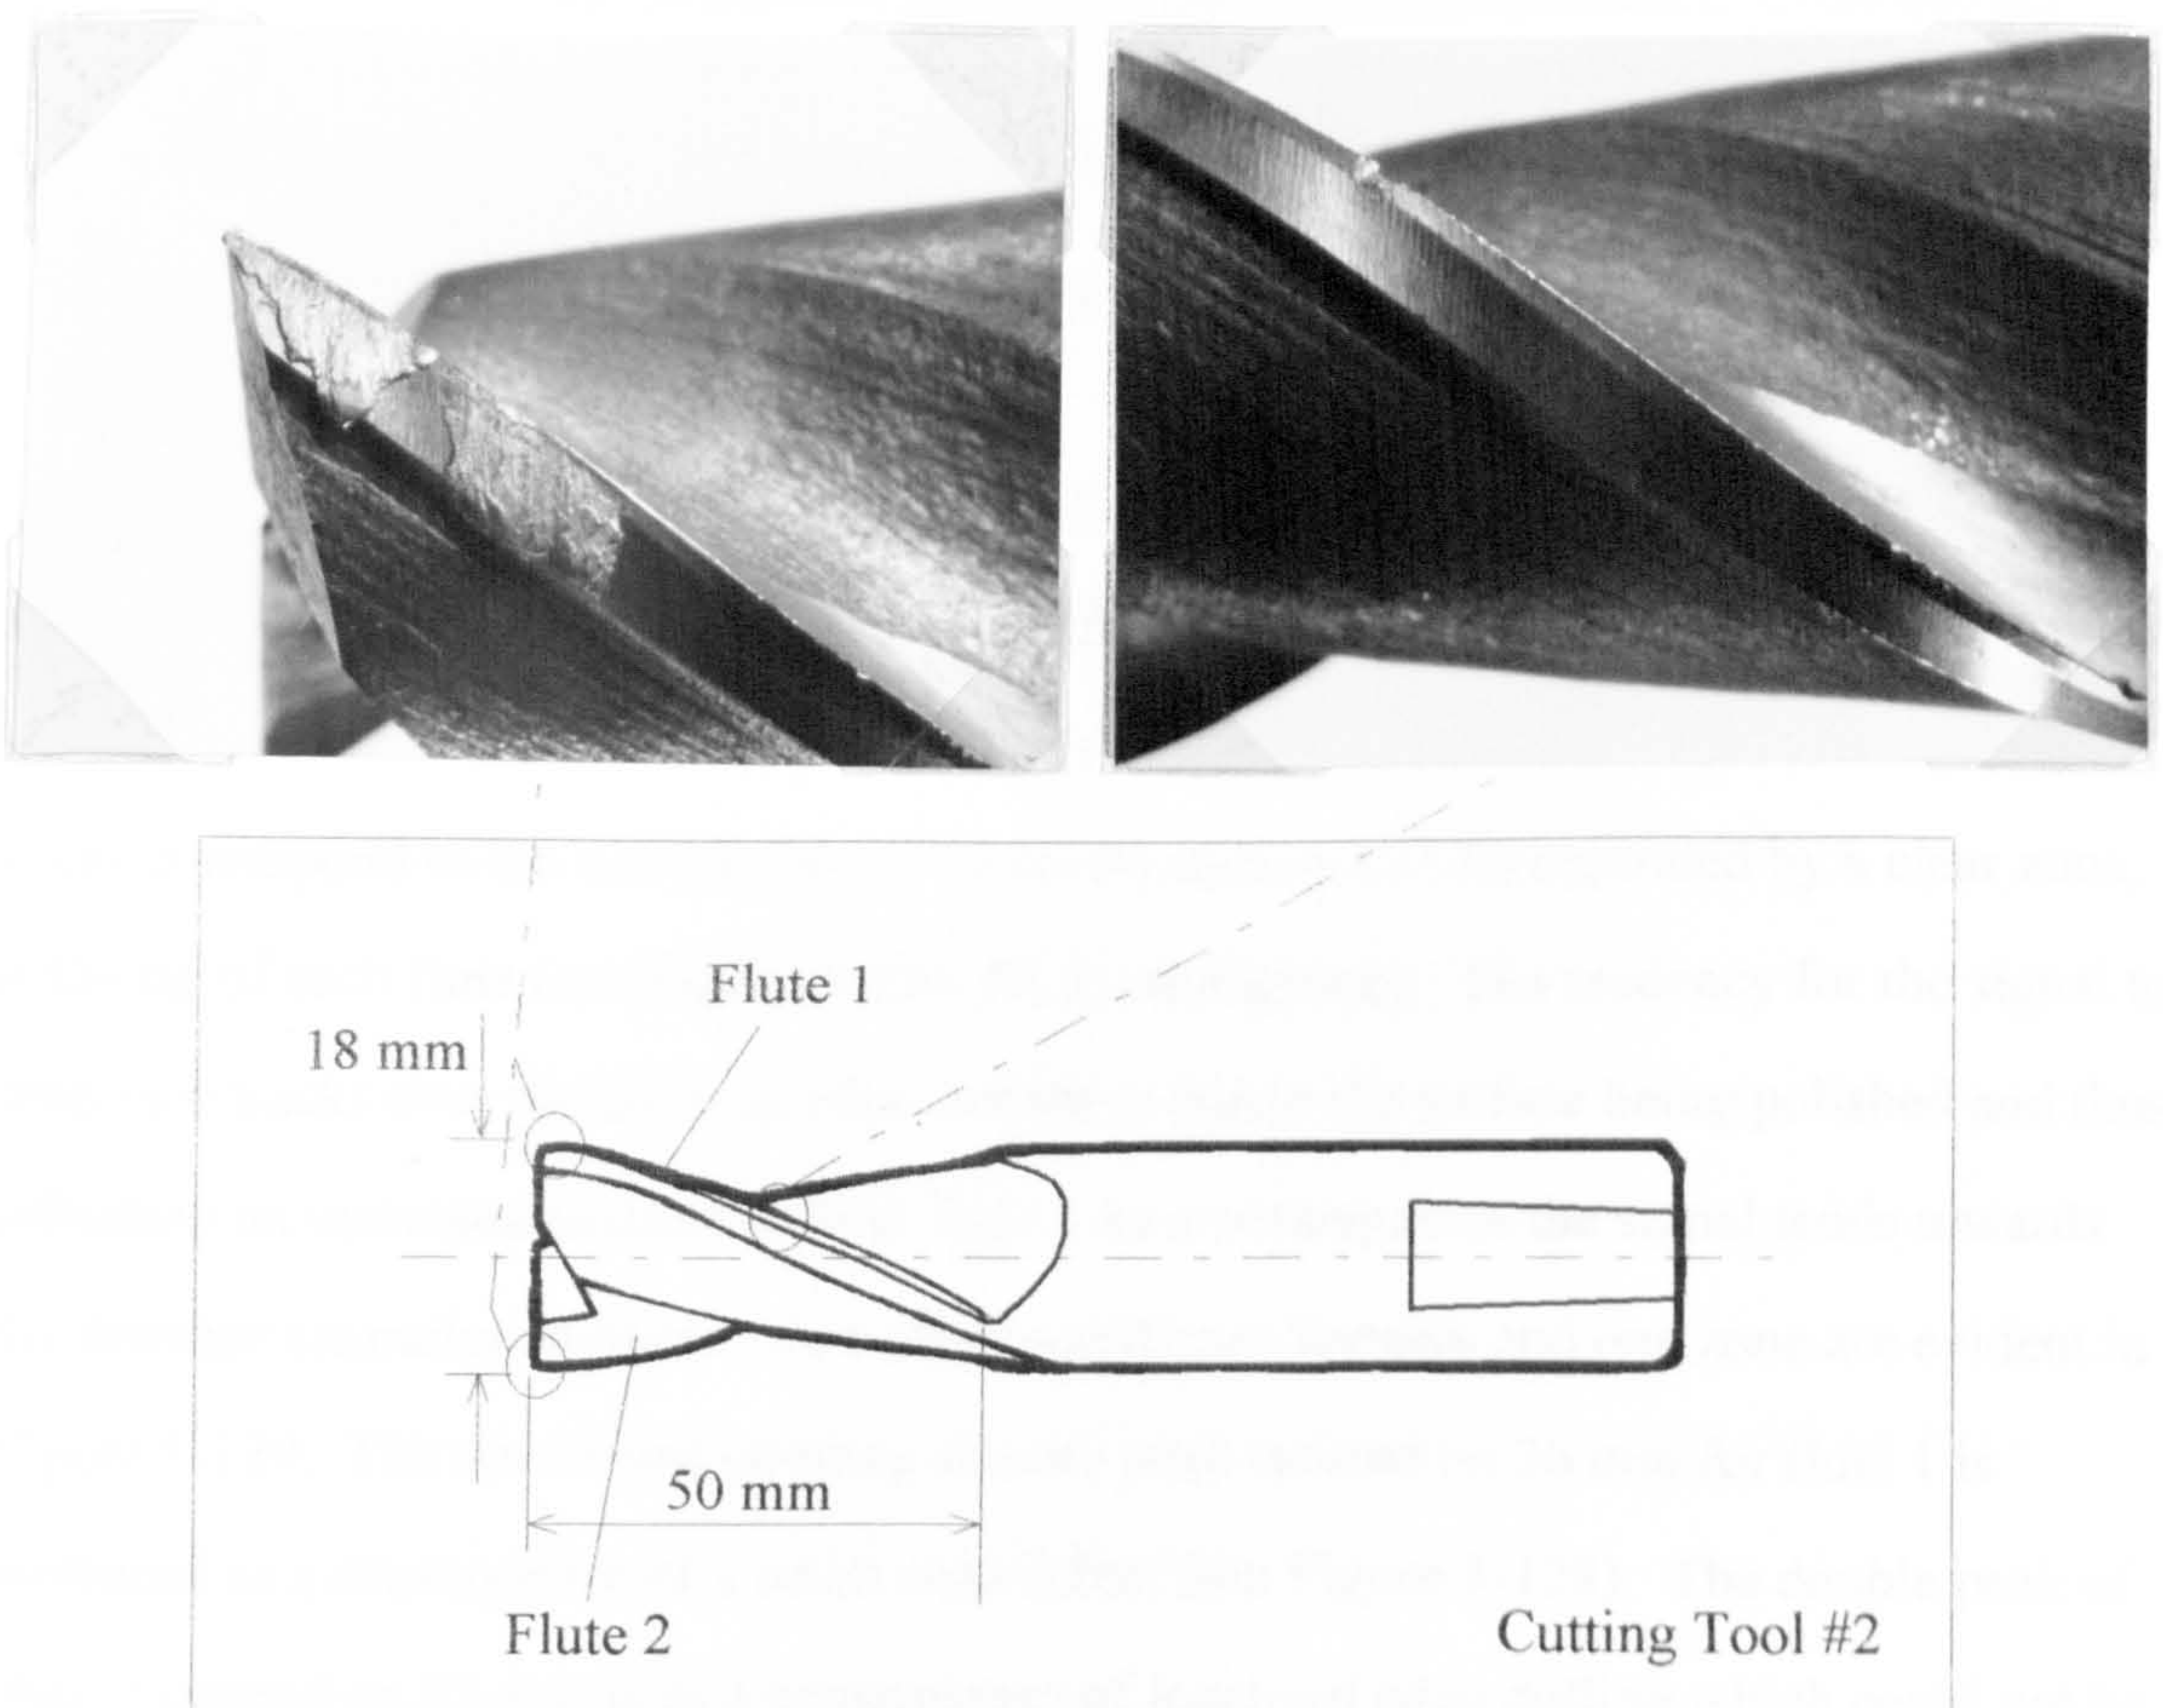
Cutting tool 2 showing defects and defect locations
